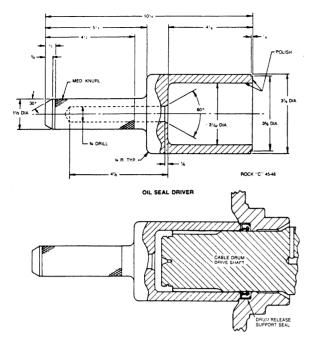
Using a seal driver as shown tap oil seal into position in drum release support.
